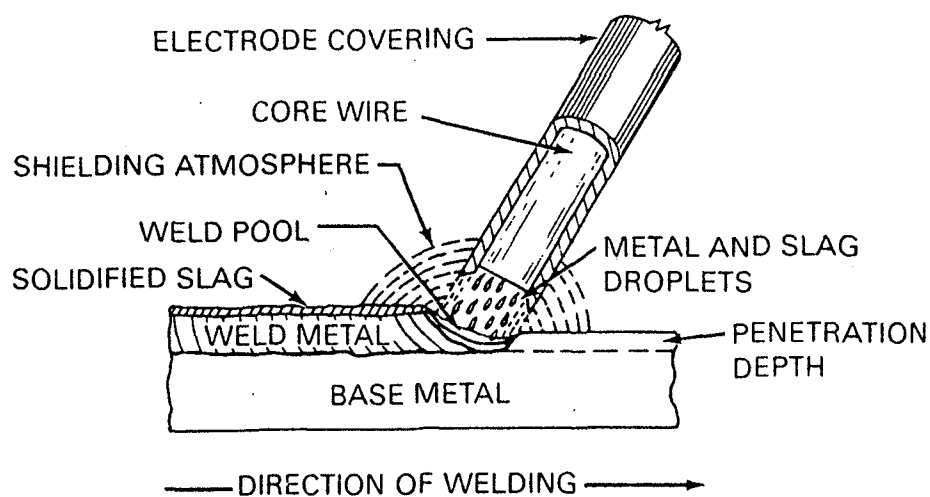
Manual Metal Arc Welding Process [5].
